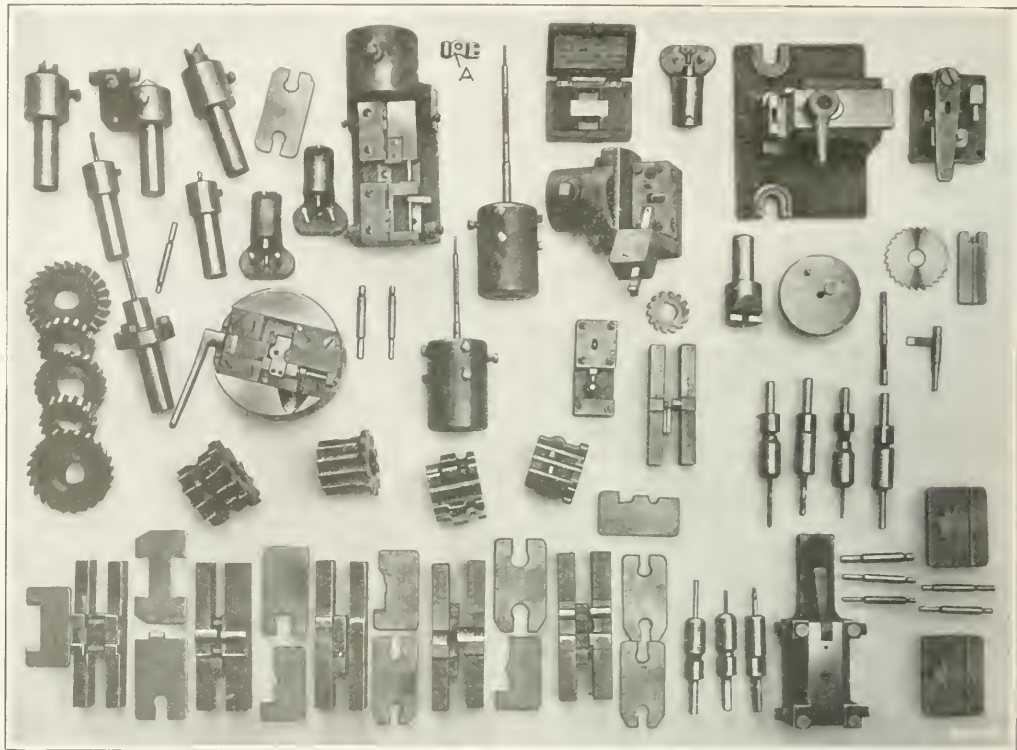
Tools and Gages used in the Production of the Needle-bar Clamp Guide on a Sewing Machine
